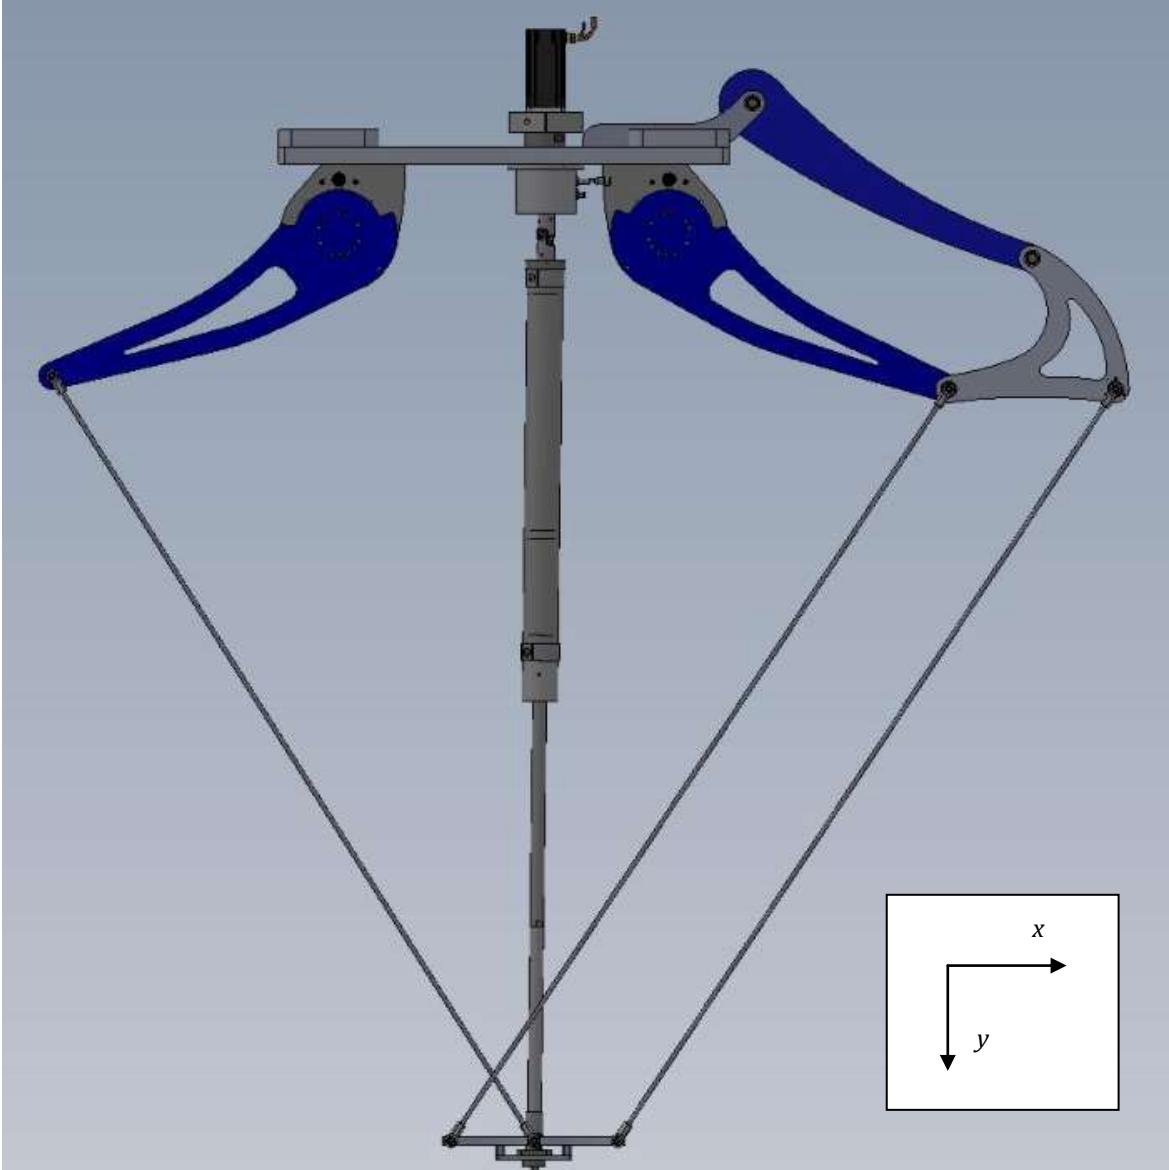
CAD Model of the Mechanical Design (Front View)
